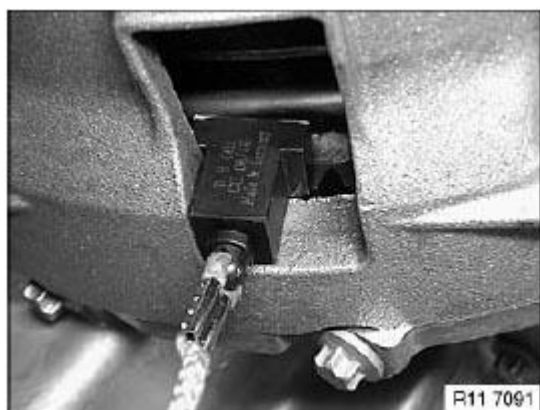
Securing Flywheel (Crankshaft) Using Special Tool 11 8 660
